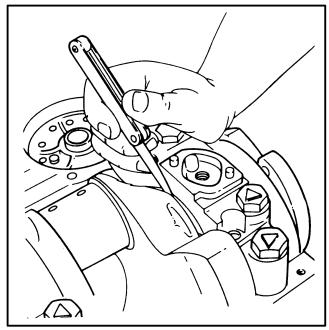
MEASURE THE AXIAL CLEARANCE OF THE CRANKSHAFT
